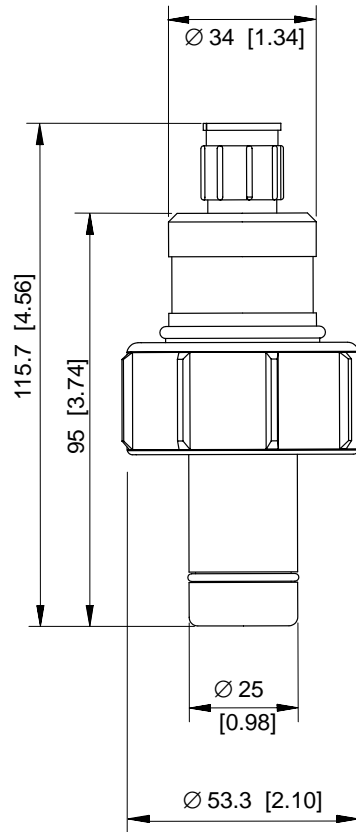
Dimension drawing InPro® 7100-25 / 7104-25 4-electrode cell
